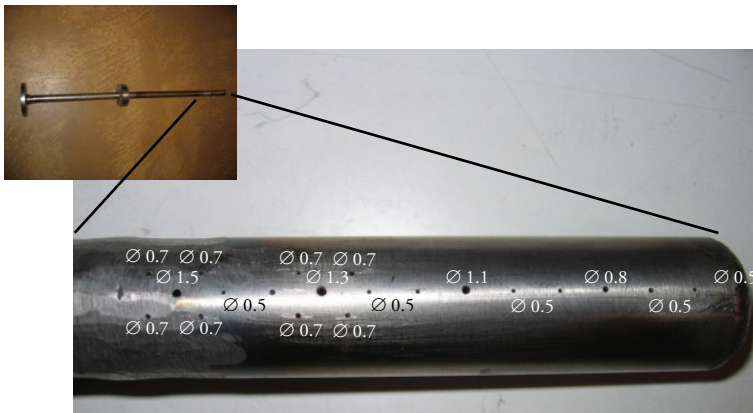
NG nozzle pipe final hole pattern (dimensions in mm)
